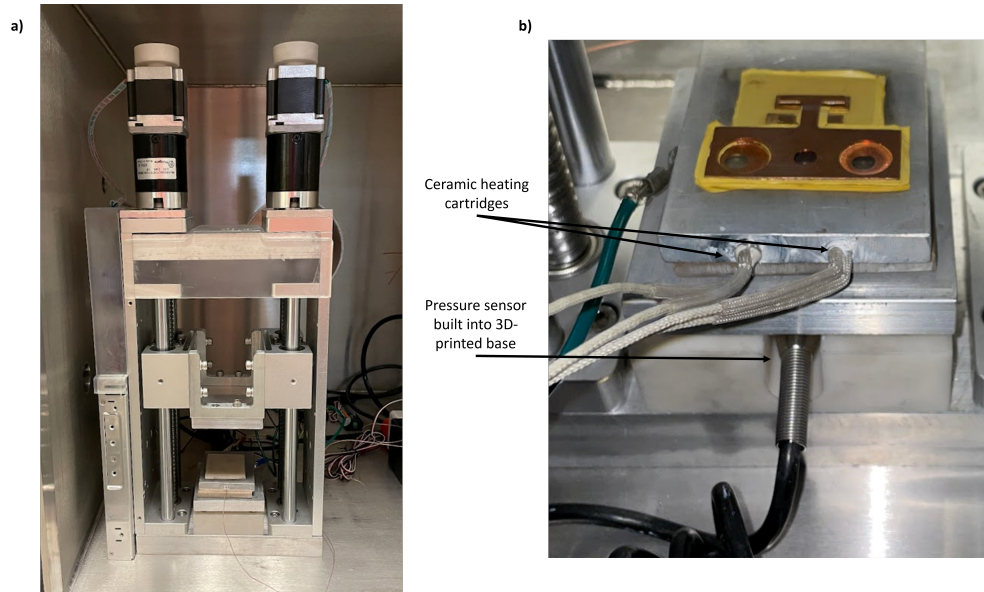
a) Full press assembly b) Close-up of press baseplate, showing embedded ceramic heating cartridges and load cell.
